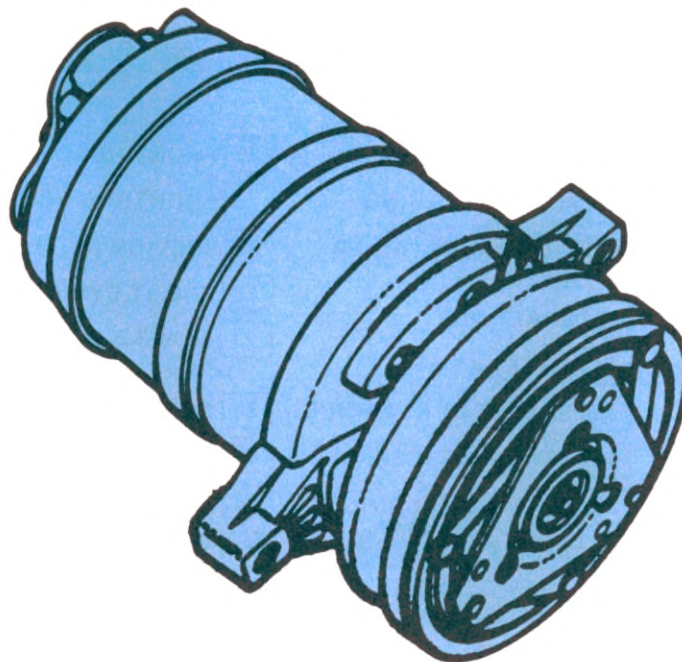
DA-6 Compressor, V-Groove Pulley & Standard Mounting
